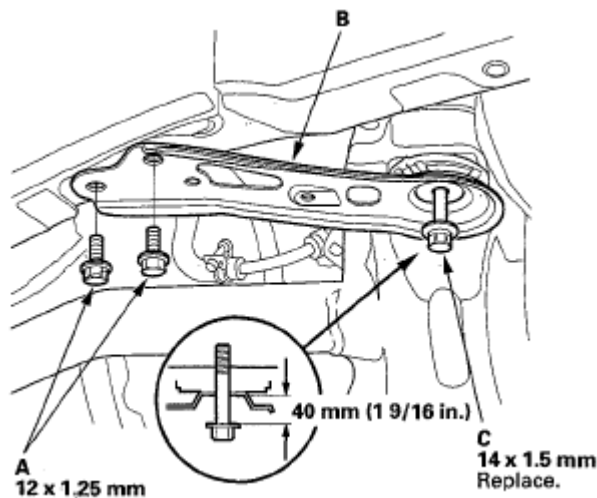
Identifying Mounting Bolts From Front Subframe Front Brackets
